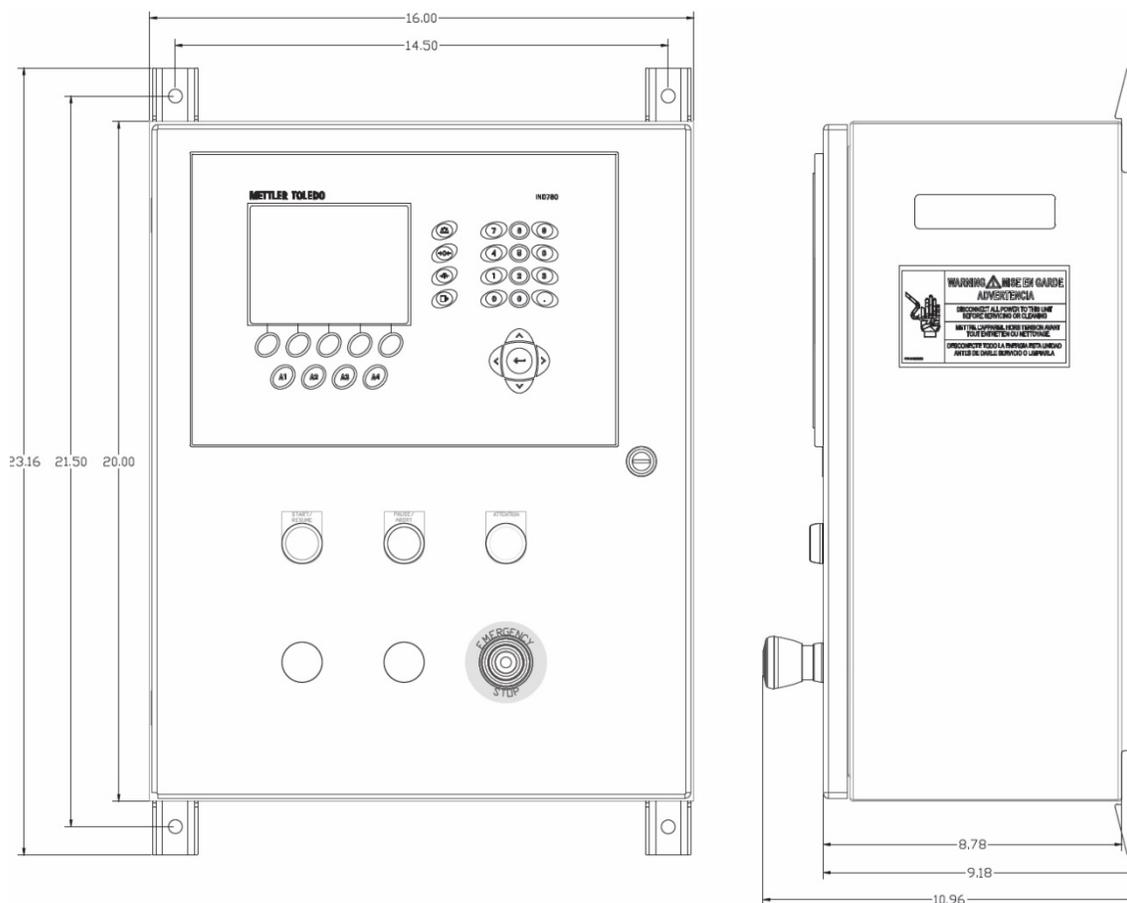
Packaged IND780batch Dimensions, Front and Side
